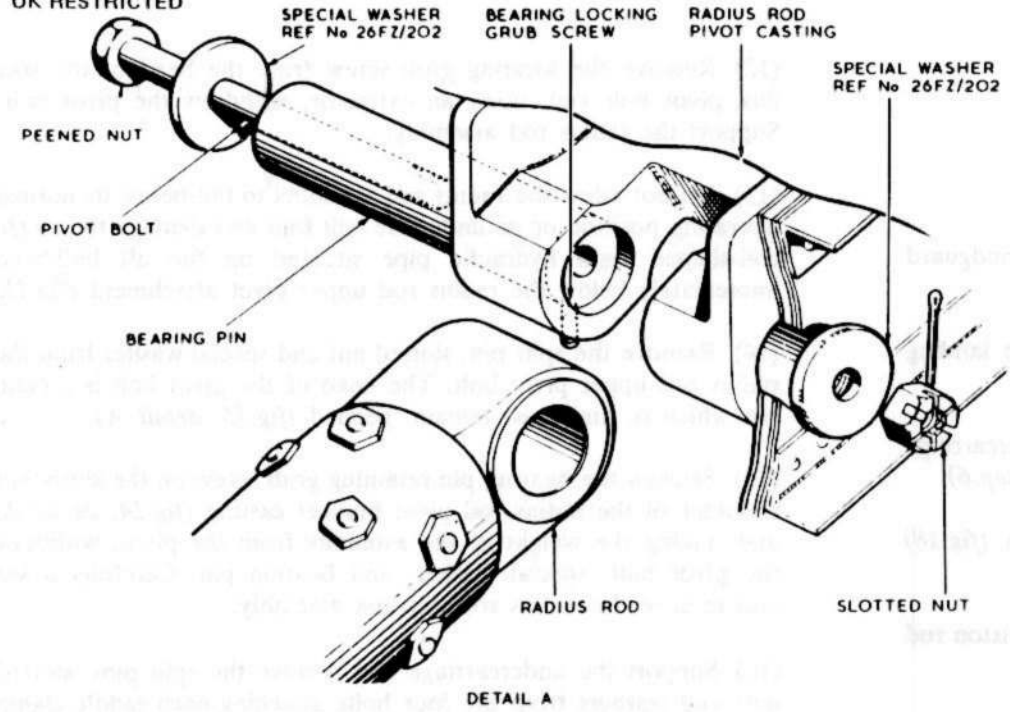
UNDERCARRIAGE REMOVAL AND ASSEMBLY (I)
